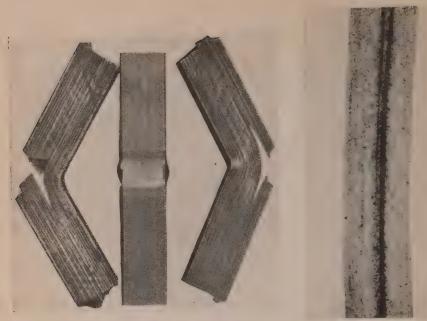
Broken Impact Pieces from Cored Bars. Fig. 11. Segregated Boiler Plate.
